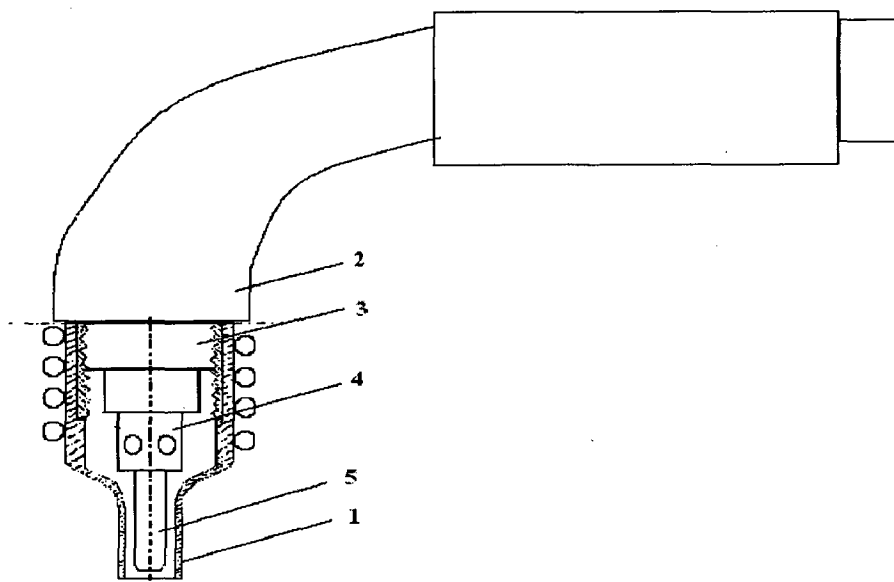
Photograph showing Conventional GMAW torch nozzle.
